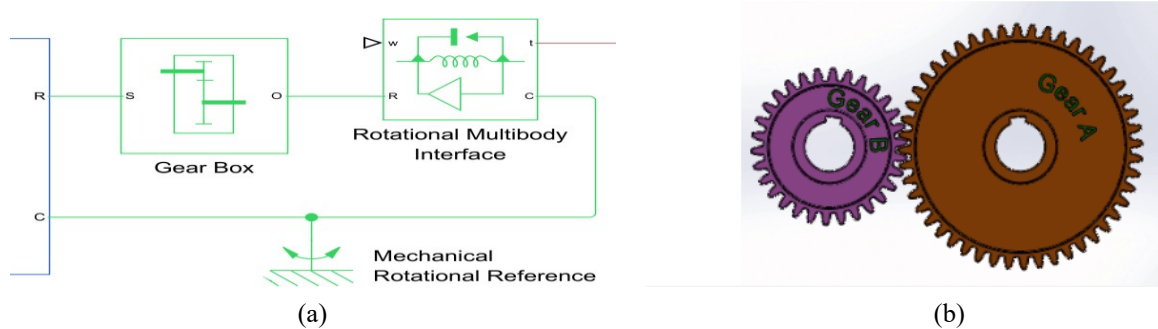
(a) Gearbox and gear reducer system, (b) Gear reduction [29]
